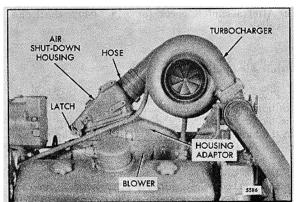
Typical Air shutdown Housing Mounting (Turbocharged Engine)
